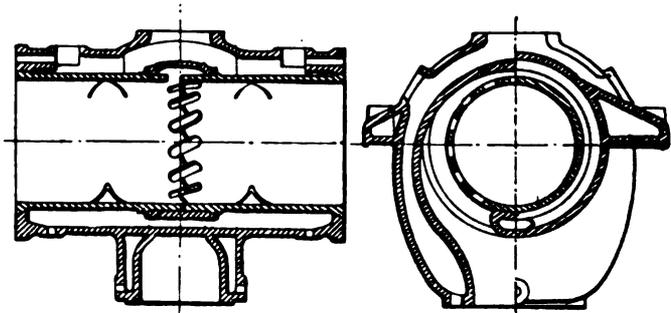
Section of Cylinder, Koerting type, Gutehoffnungshütte.
